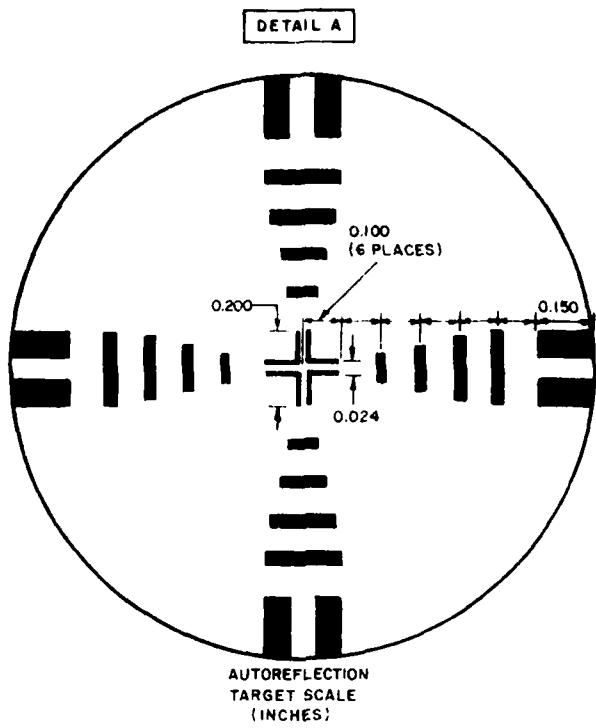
AS-2622/APN-190 (V) ANTENNA ASSEMBLY FIXTURE
